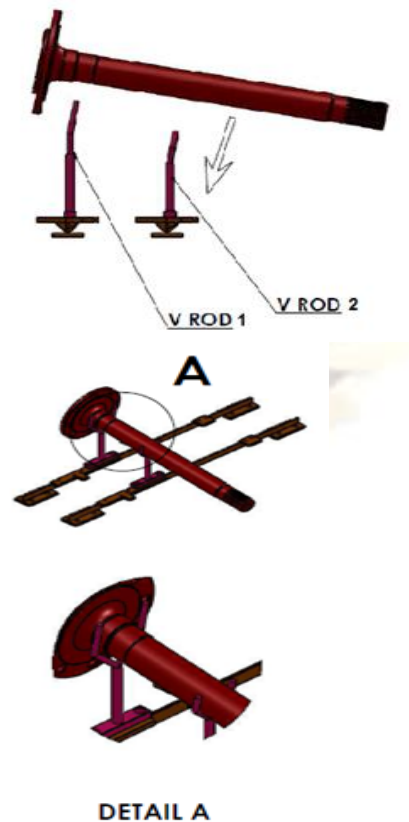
Mounting of rear axle shaft on fixture elements.
